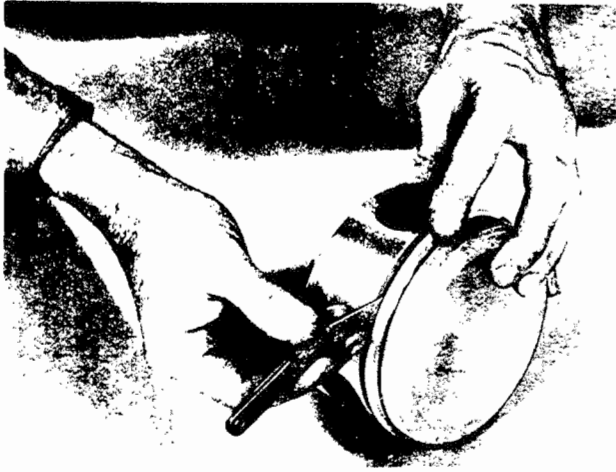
INSPECTING PISTON RING SIDE CLEARANCE.
